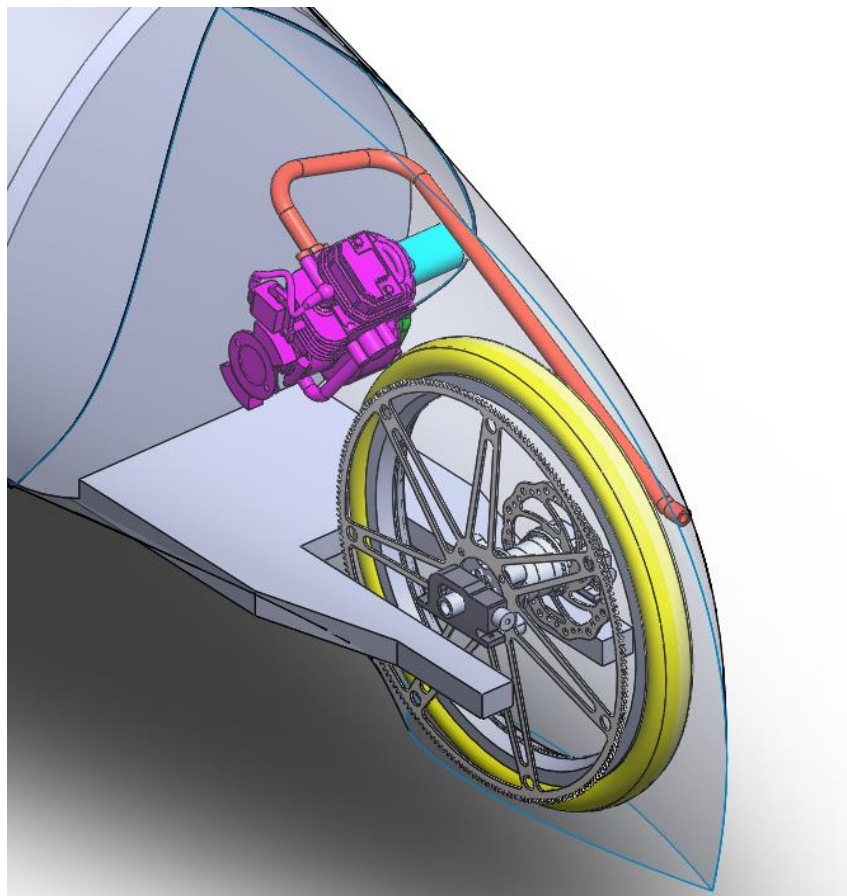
Packaging of Starter and Engine Assembly in SMV Chassis
